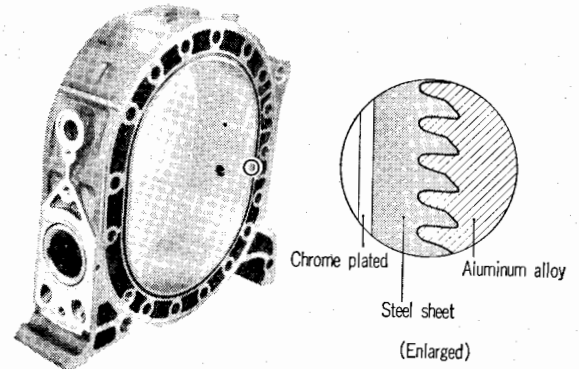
Cross-sectional structure of SIP rotor housing
